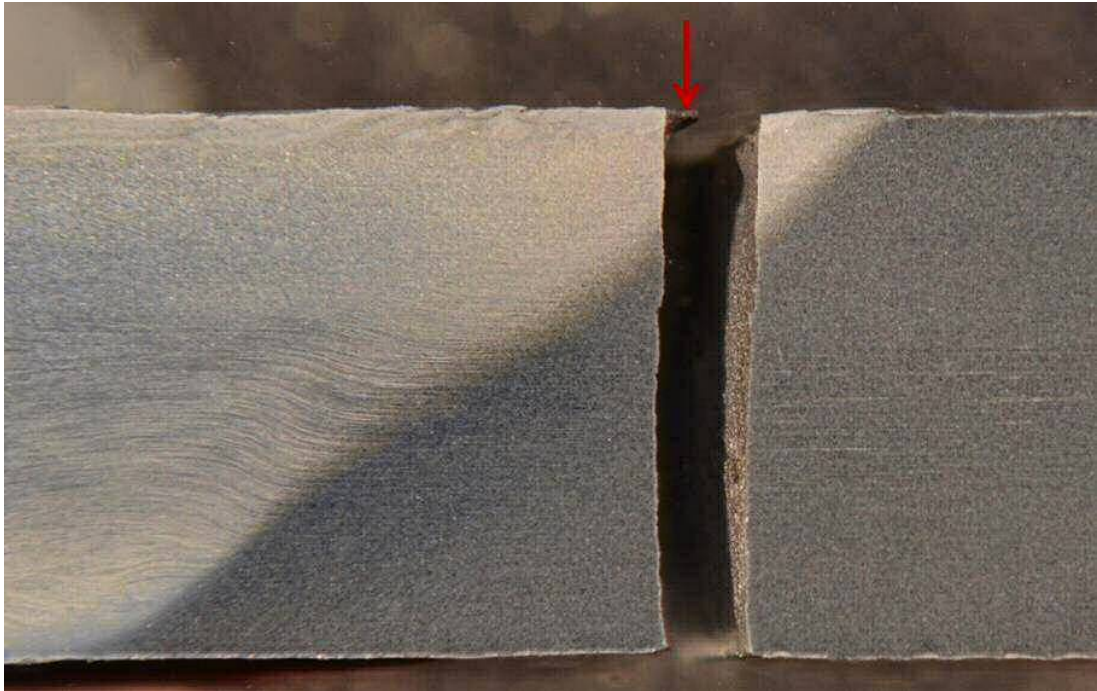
Macrograph of intermediate weld sample's fracture path (side view) [Etched]
